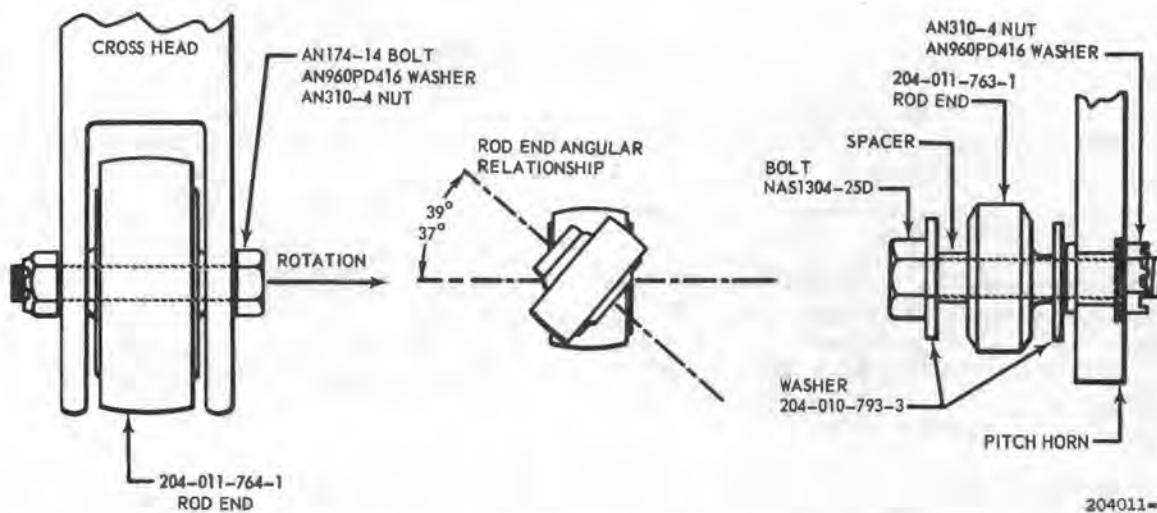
Link assembly installation(UH-1B Serial No. 60-3546 thru 64-14100)
